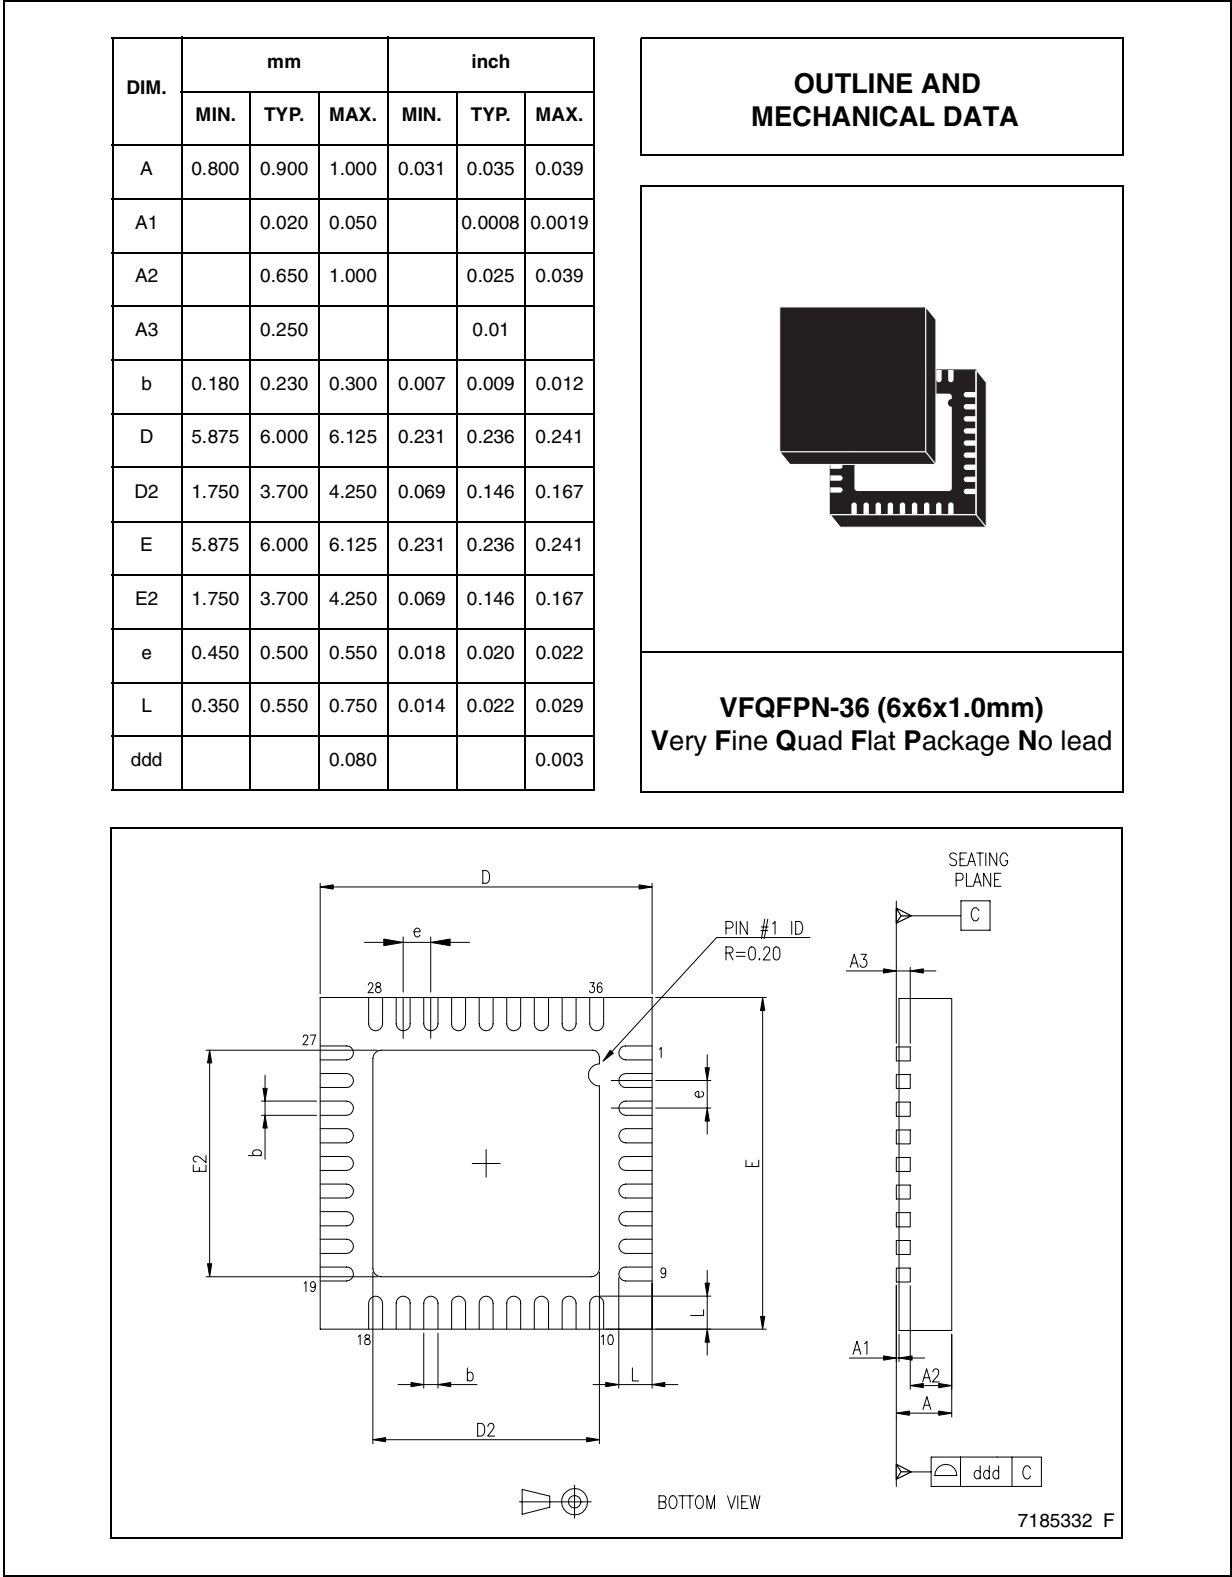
VFQFPN-36 Mechanical Data & Package Dimensions
